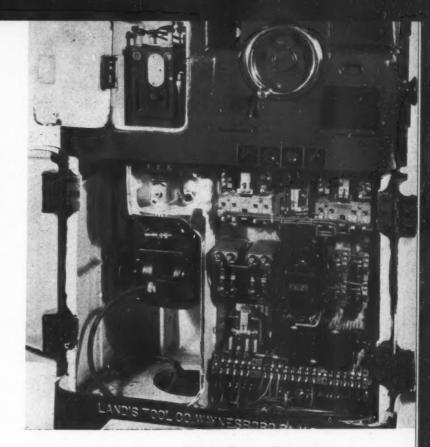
Above—Front of machine opened to show mercury switch for sixing device, work drive and control panel
